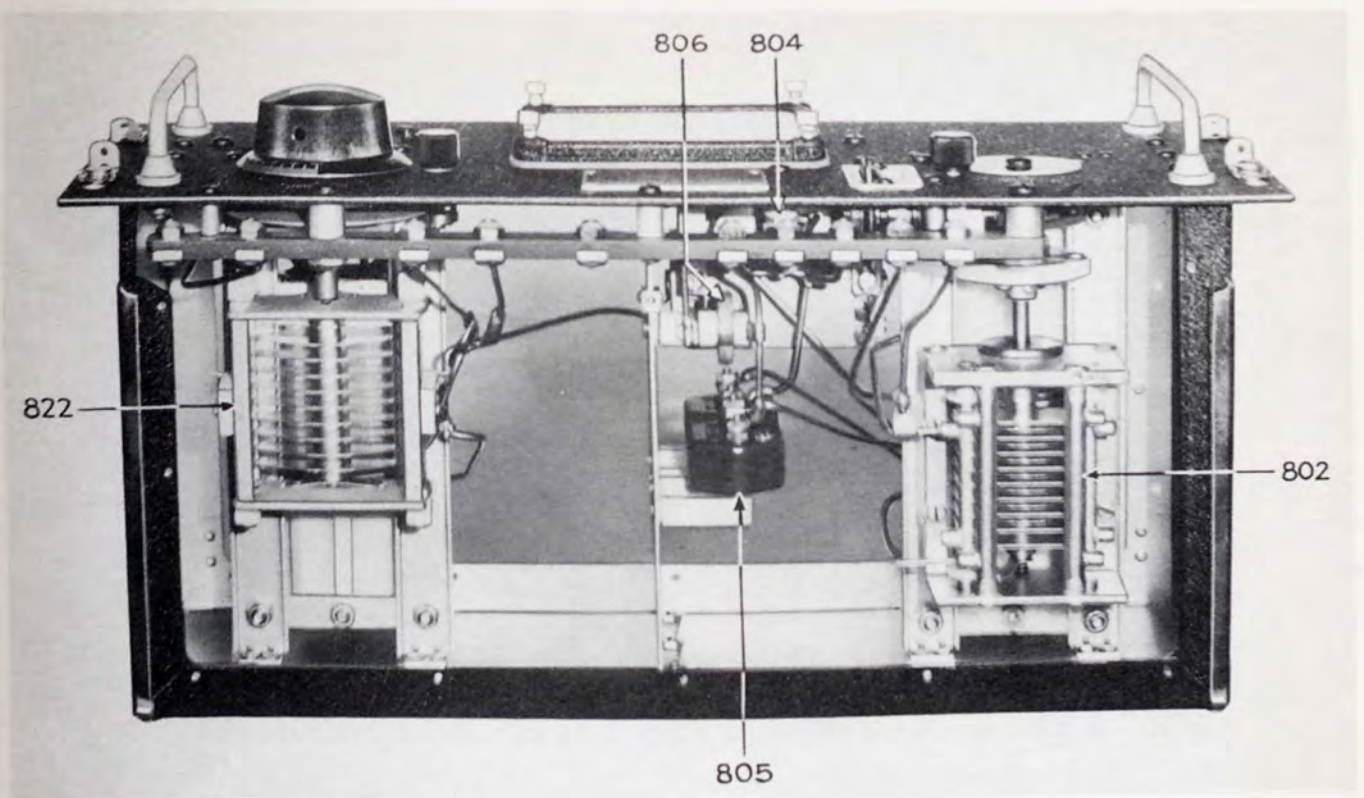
TRANSMITTER TUNING UNIT TU-8-B, TOP VIEW, COVER REMOVED
